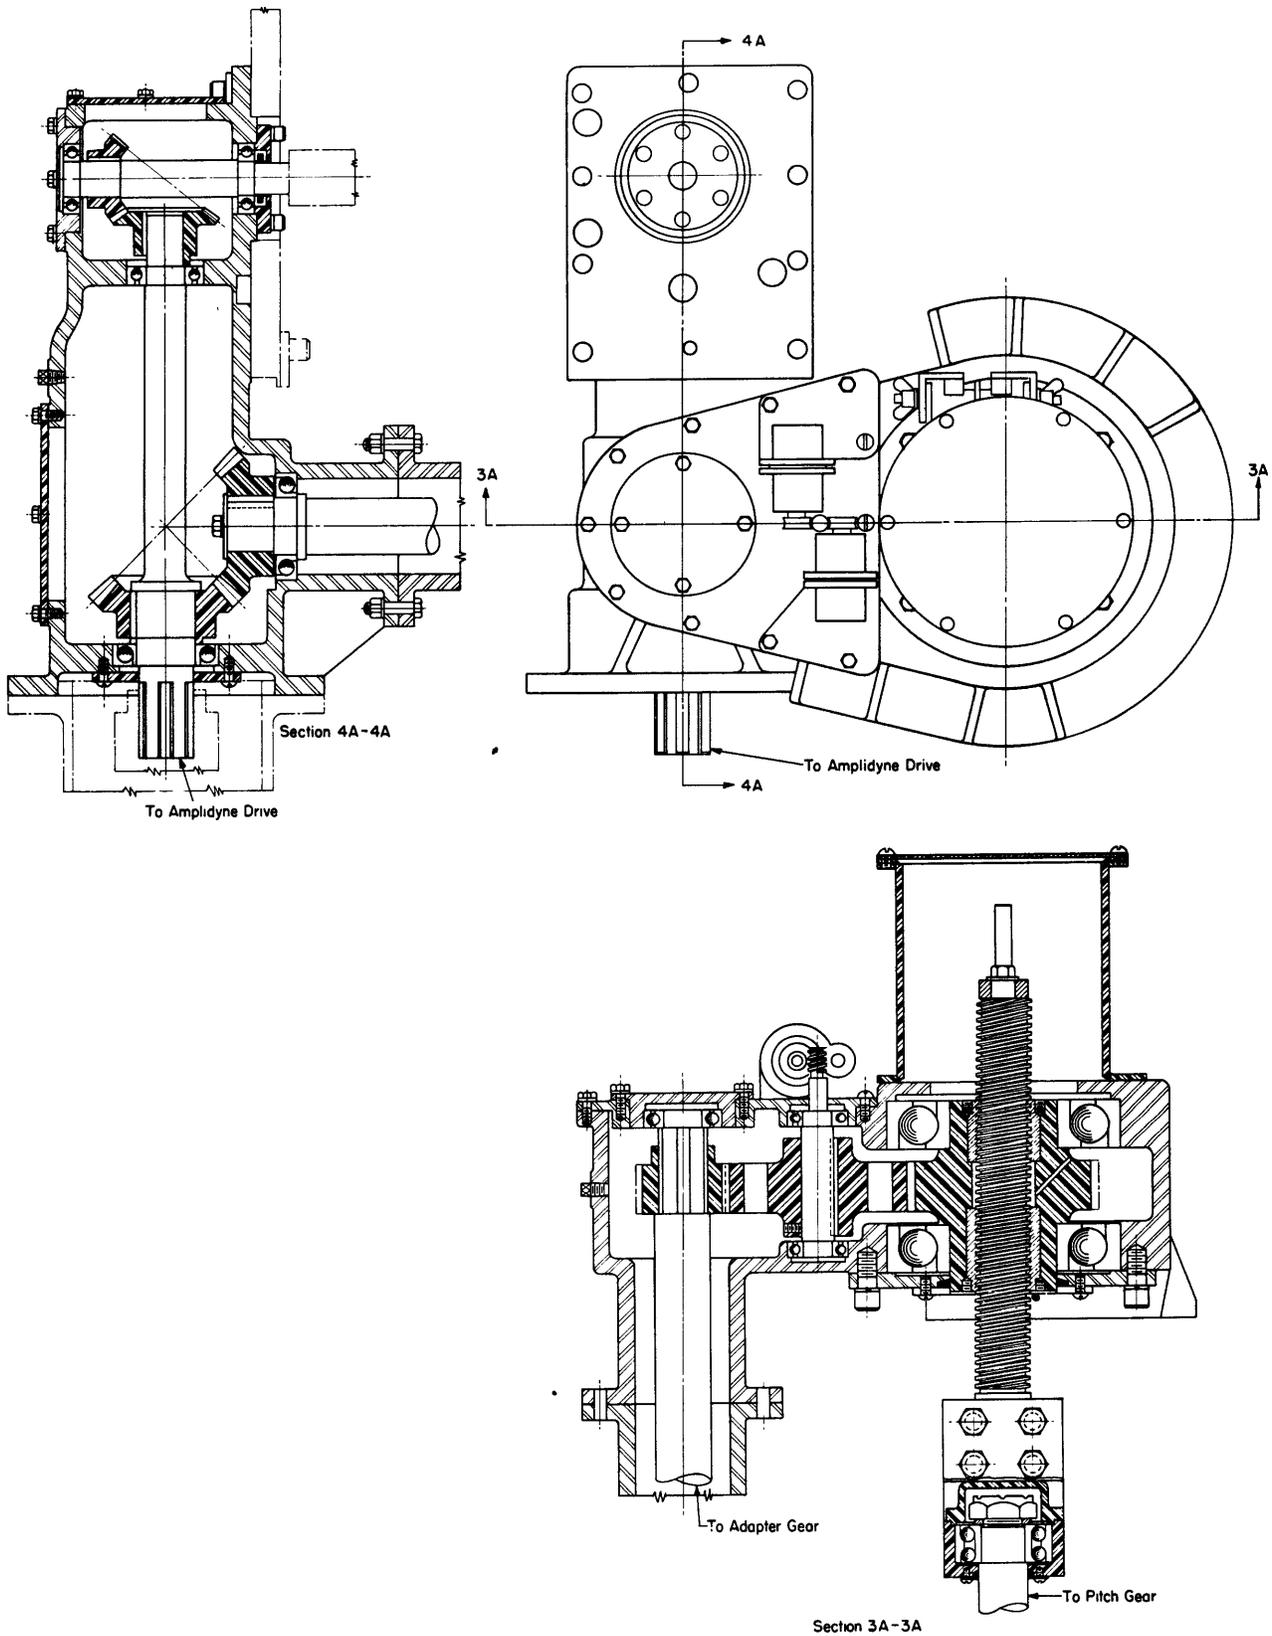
Diagram of the Clutch Shifting Arrangement between the Amplidyne D-C Motor Clutch and the Pitch Mechanism
